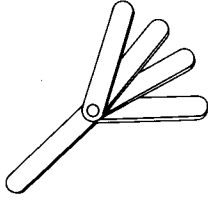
A feeler gauge, which has thin metal strips of different thickness.
